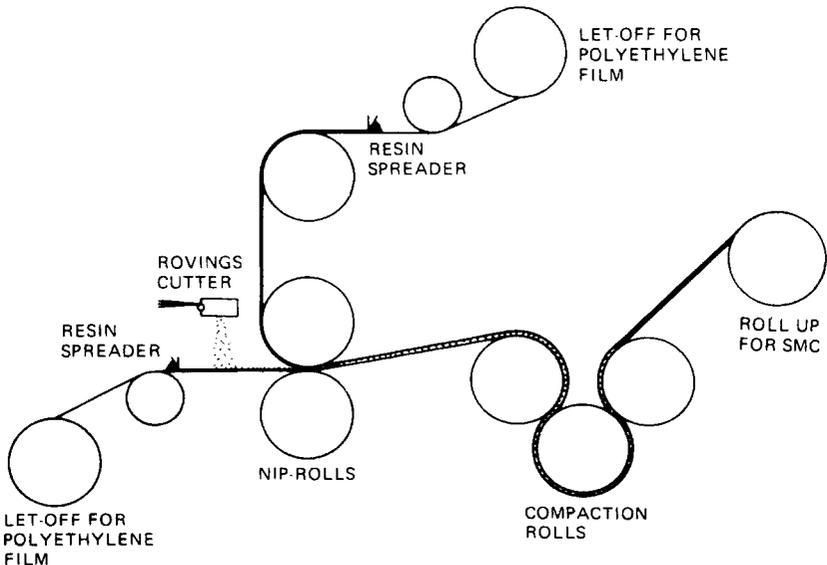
Outline of machine for preparing sheet moulding compounds (SMC)
